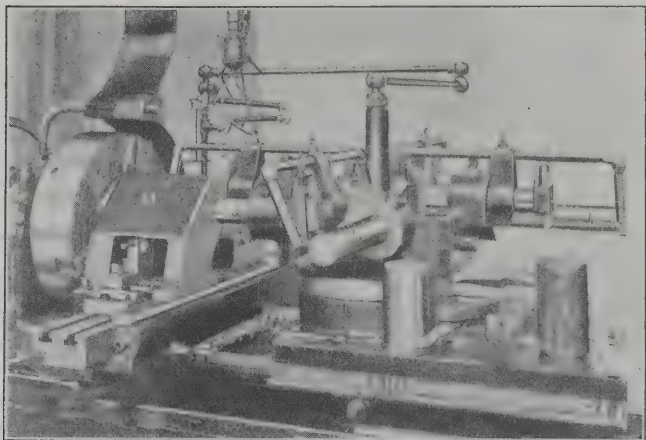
Turning and Facing the Outside of the Bowl with Supported Tool-holders of Special Construction
